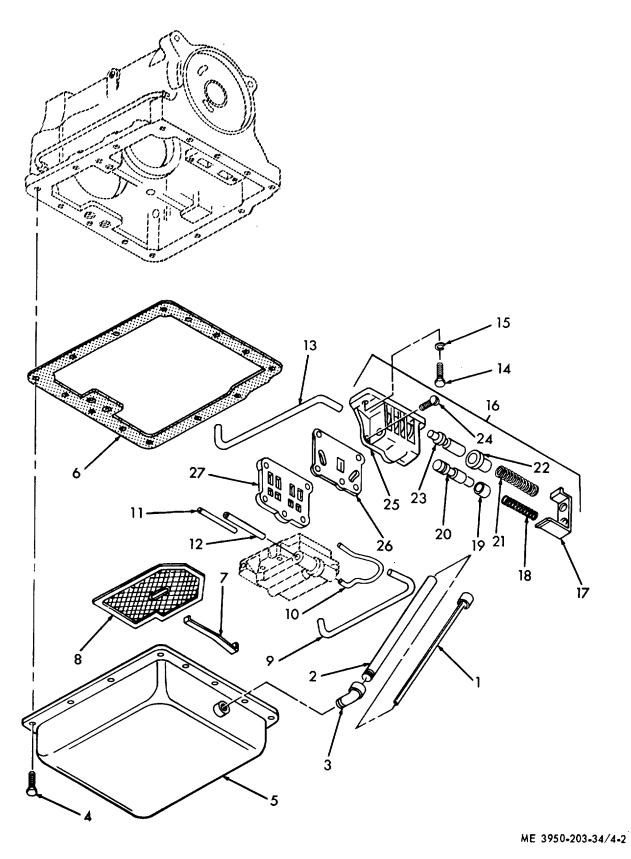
Transmission oil pan and regulator valve, exploded view.
